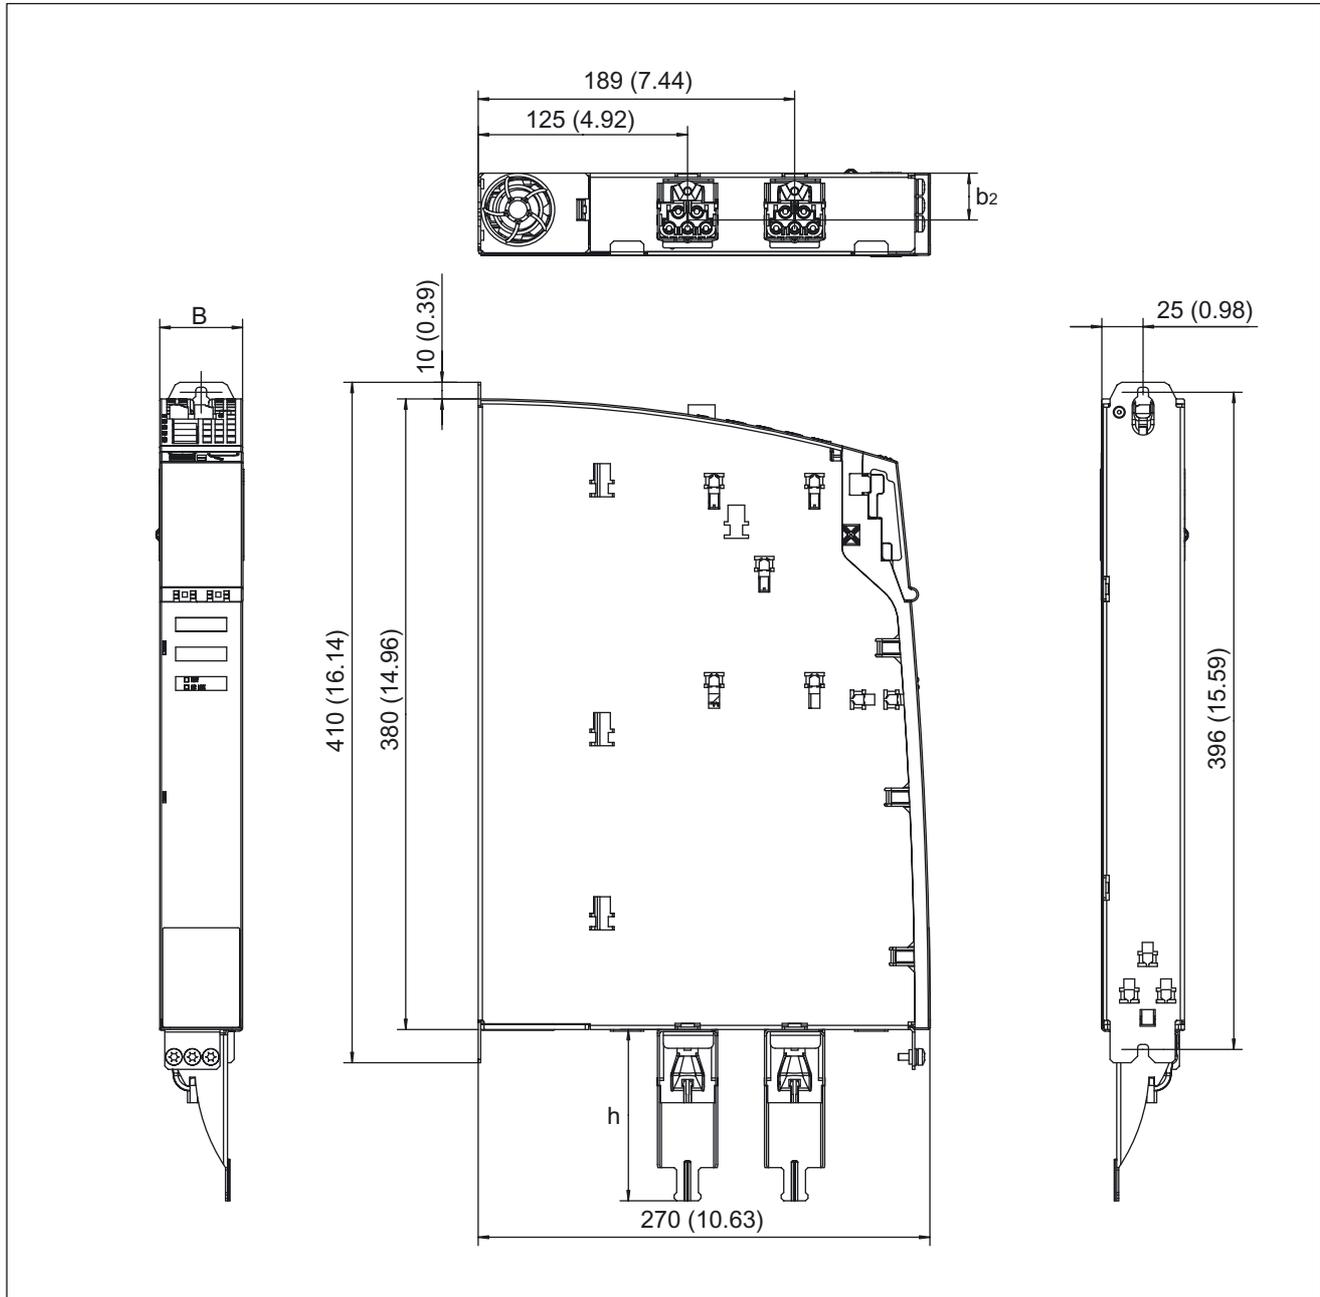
Dimension drawing of Motor Module in booksize format with internal air cooling 3 A to 18 A and 2 x 3 A to 2 x 9 A, all dimensions in mm and (inches)
